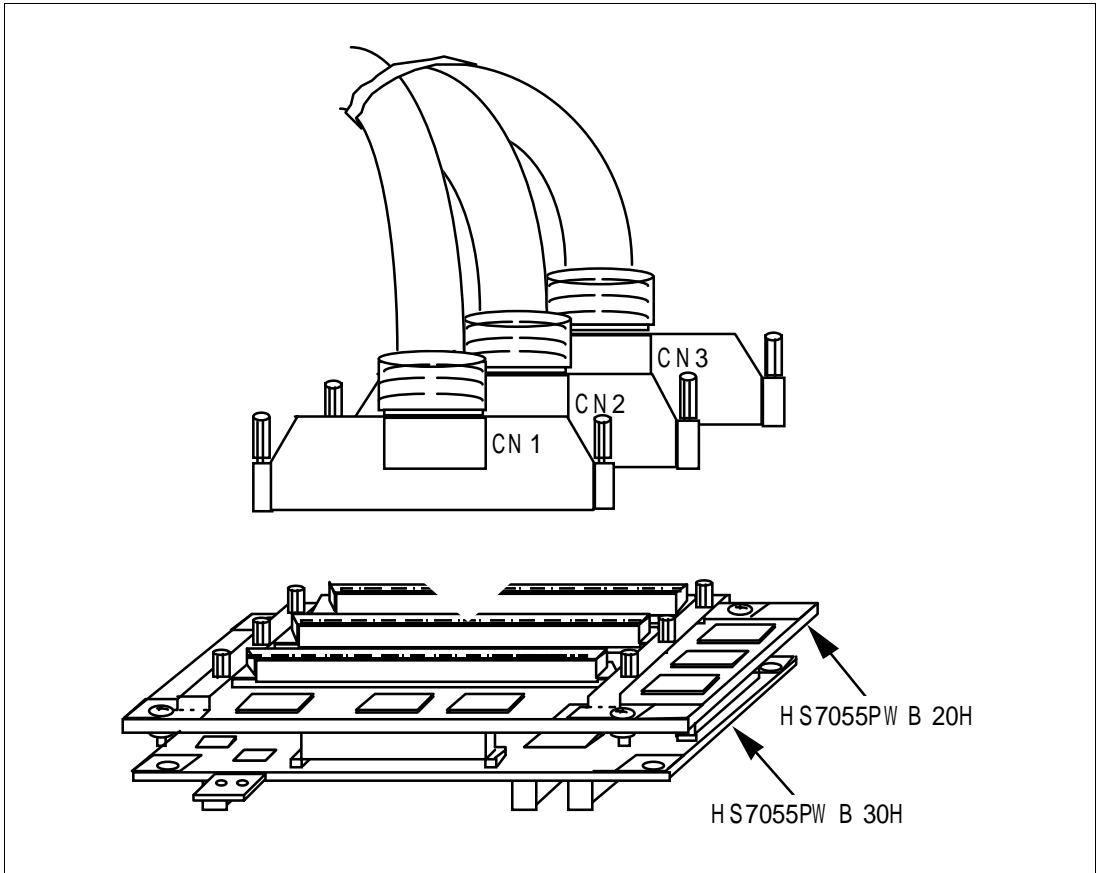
Connecting Trace Cables to the EV-Chip Board
